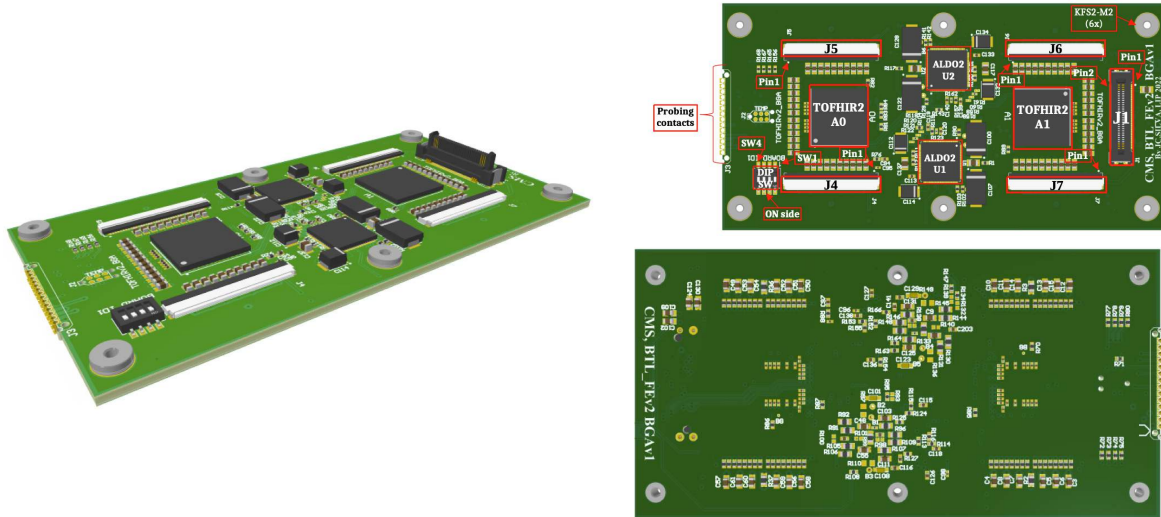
Front-end drawings are shown with a side view on the left and top and bottom views on the right, where all components are visible.
